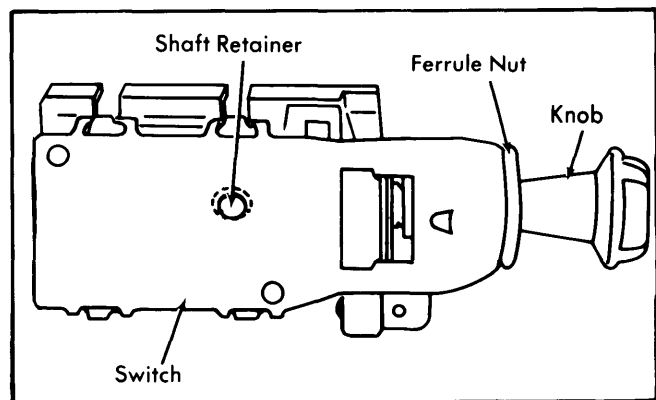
IHC Headlight Switch (with Fuse & Circuit Breaker)
